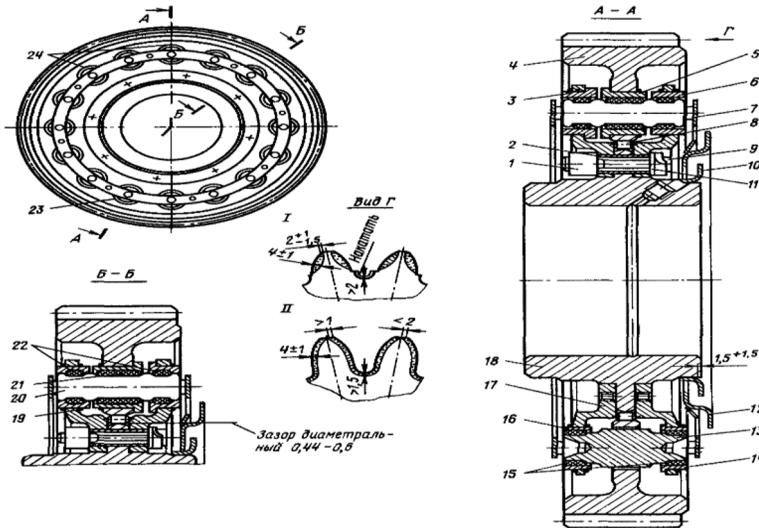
A toothed wheel of assembled construction in the wheel-motor unit of mainline locomotives
